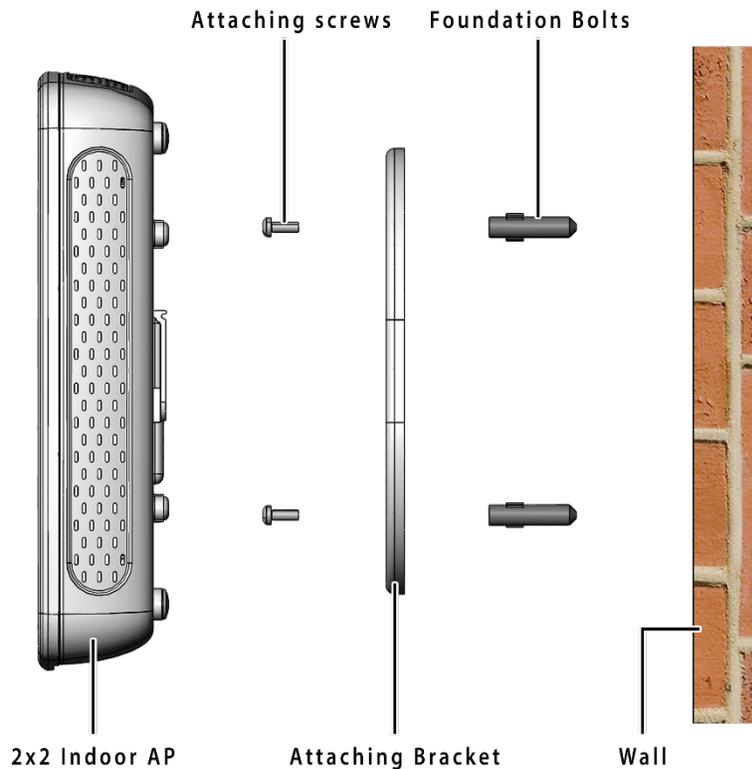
Attaching parts for wall/ceiling mounting of indoor AP
